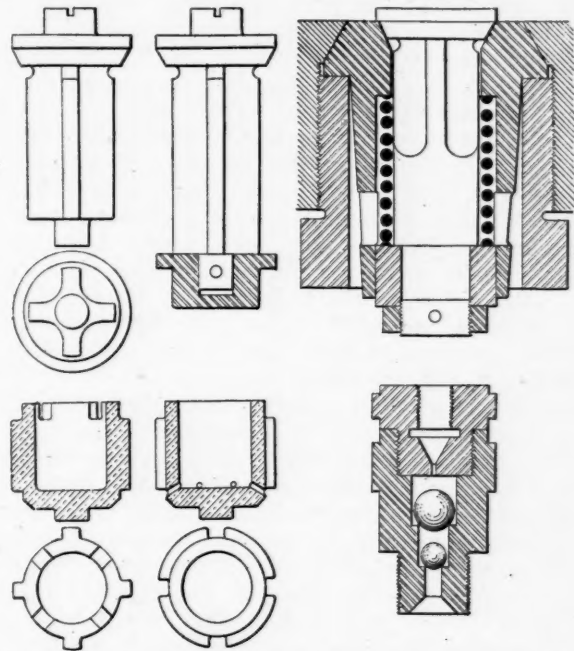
Types of poppet, cylindrical and ball check-valves used in internal-combustion engines
